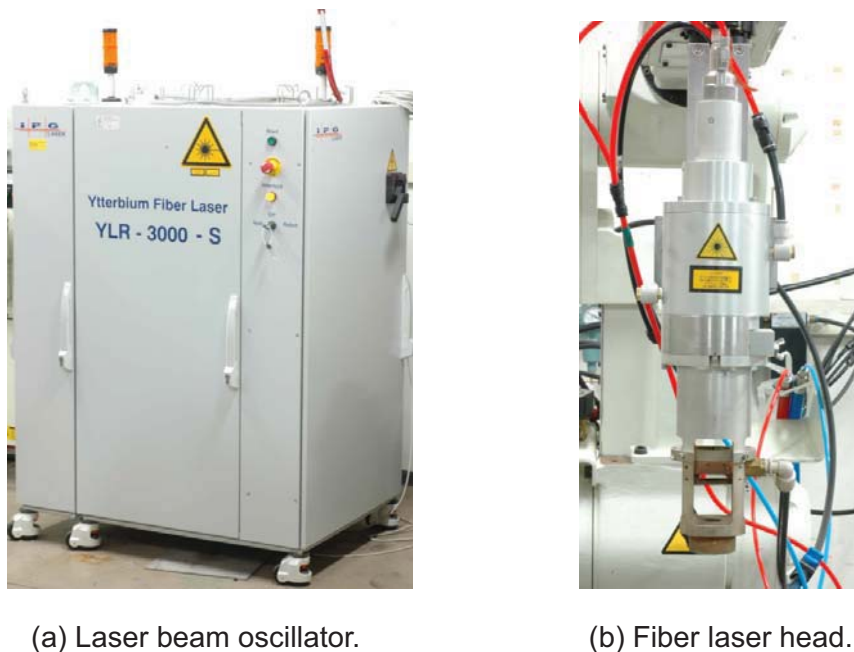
Image of fiber laser welding equipment.
